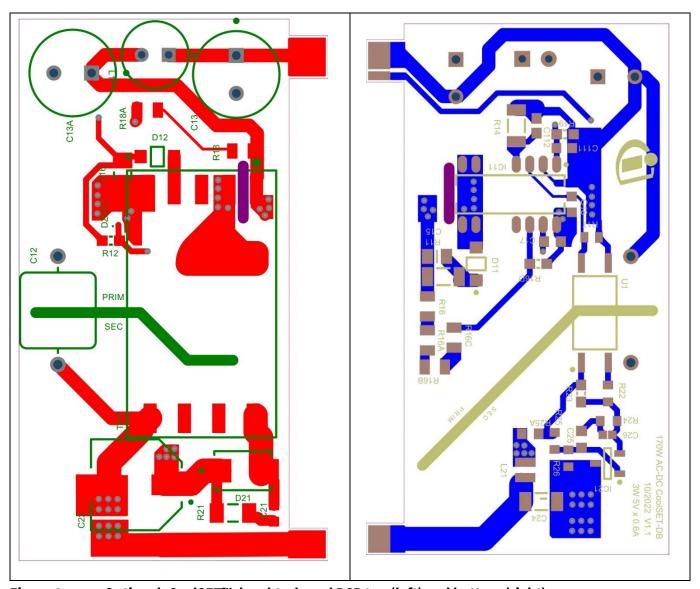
Optional: CoolSET™ daughterboard PCB top (left) and bottom (right)
